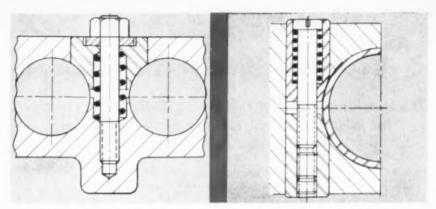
When clamp retains two members, a spring can be used to release the members.
